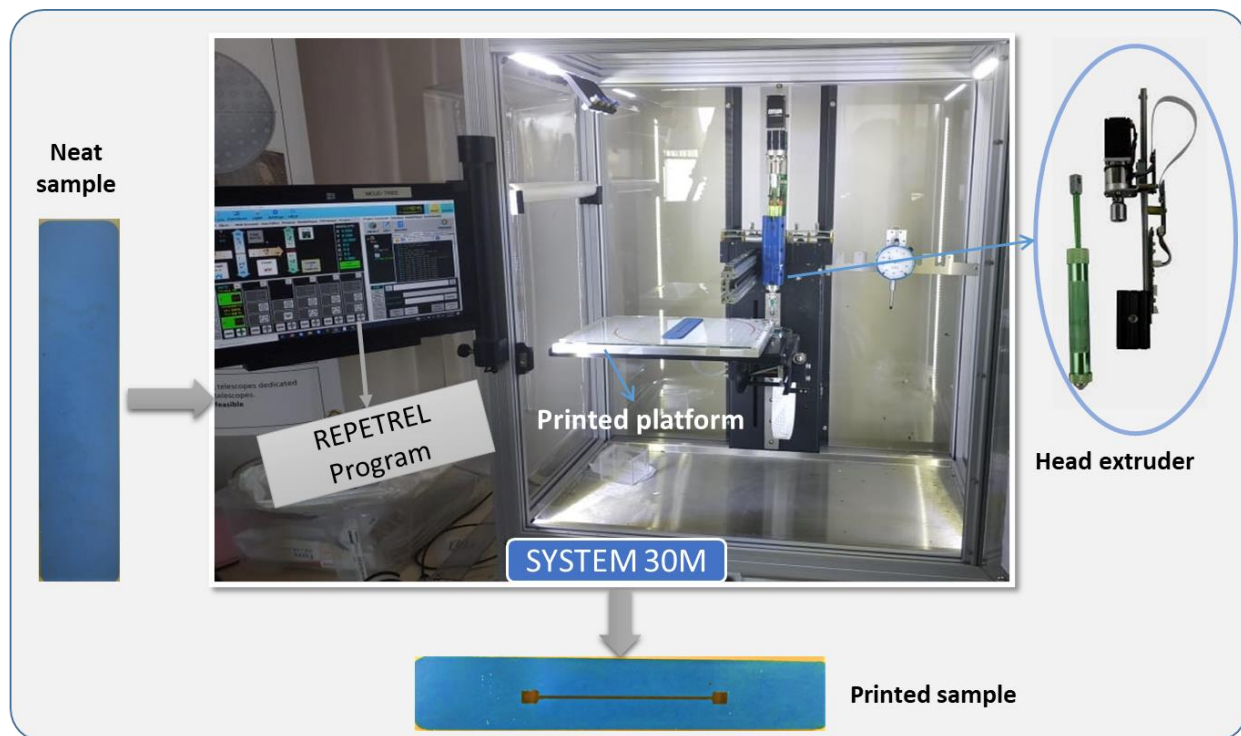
The printing process used to make a one printed-line coating on a 2D sample.
